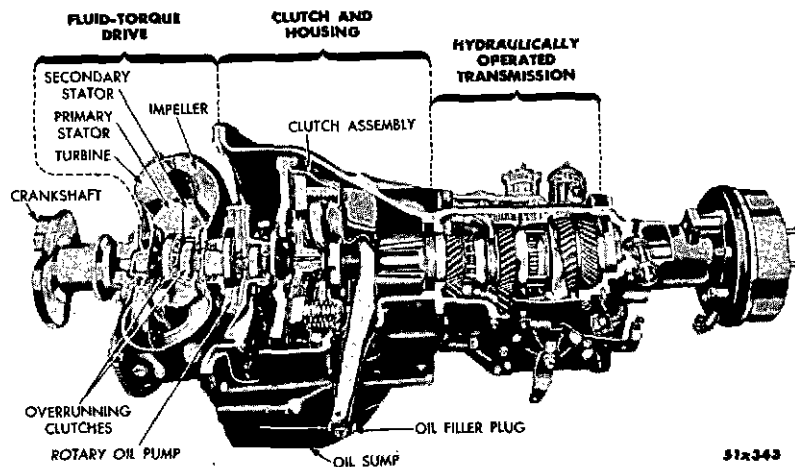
Fluid-Torque Drive and Hydraulically Operated Transmission
